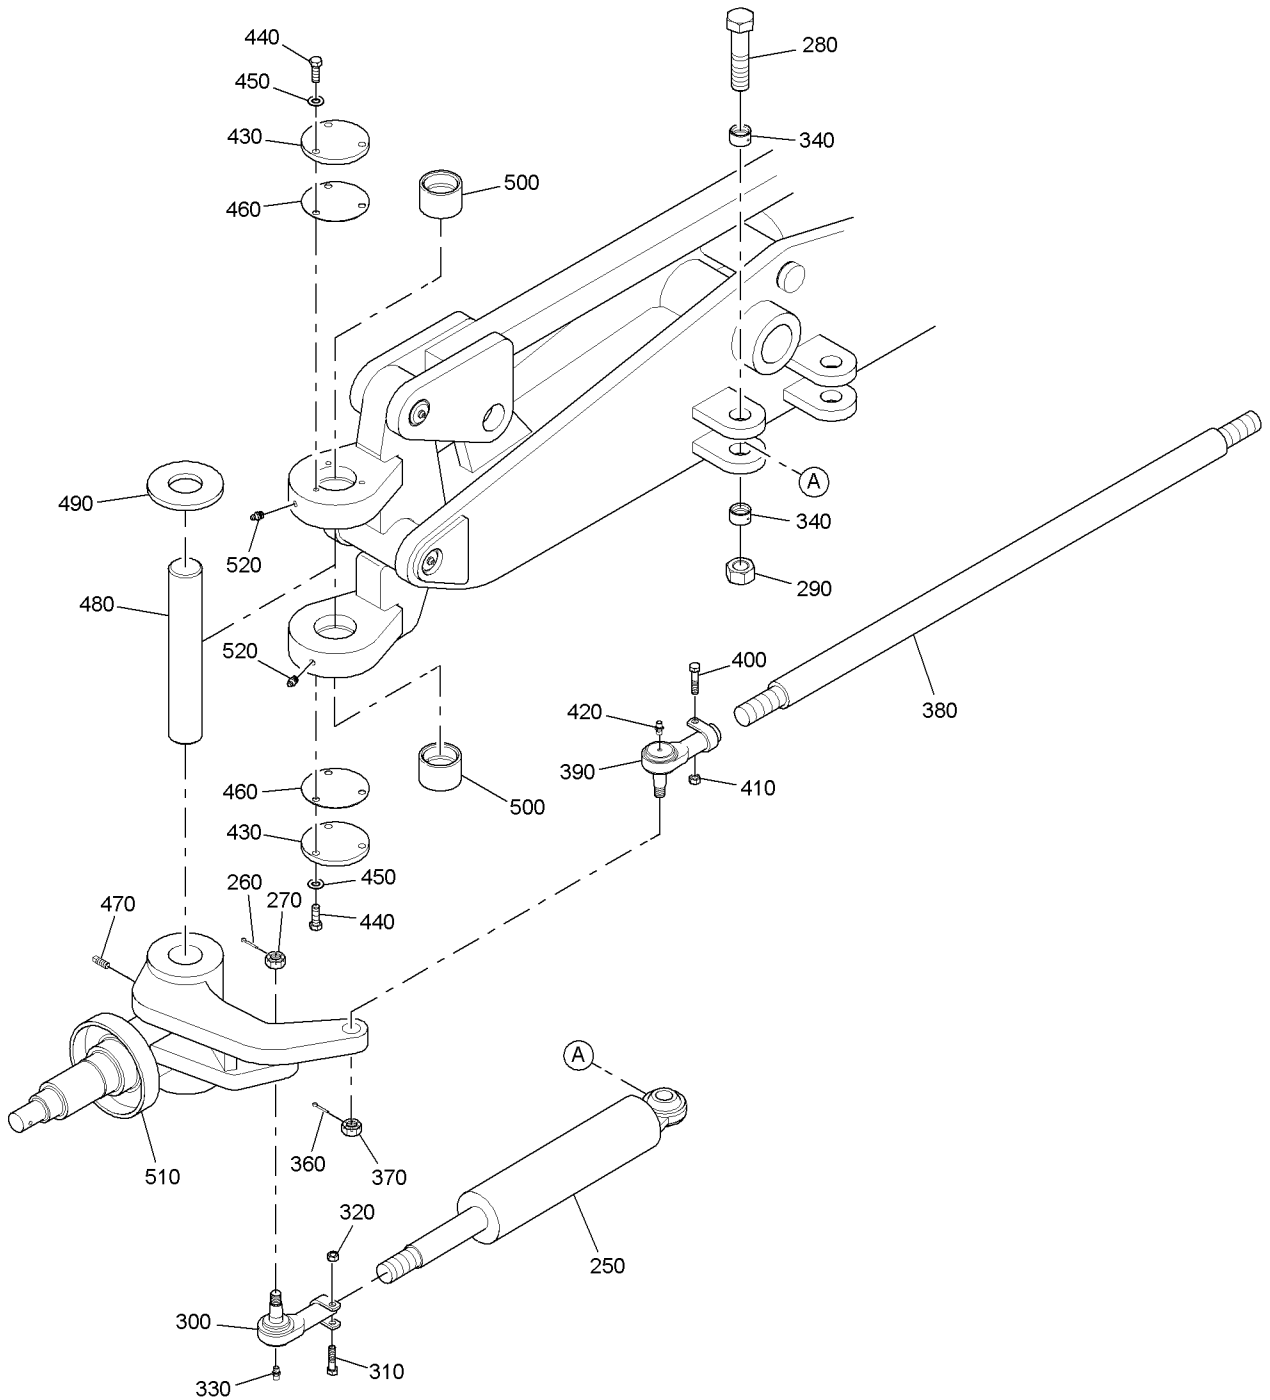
FRONT AXLE ASSEMBLY (SHEET 3 OF 6)
